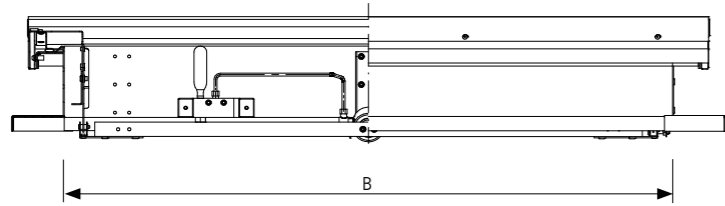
Section B-B of mcr LAM louvered vent in closed position (façade installation)
